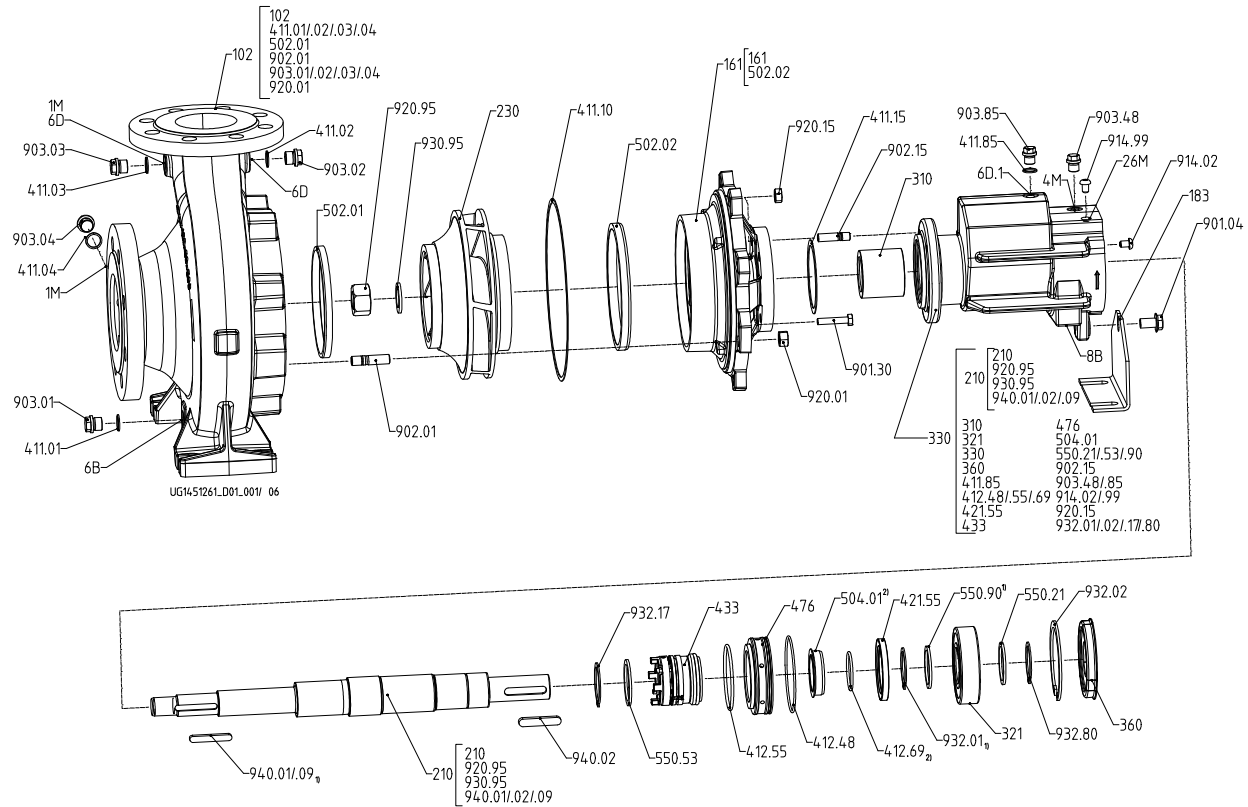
Exploded view of Etanorm SYT; bearing brackets WS_35_LS / WS_55_LS
